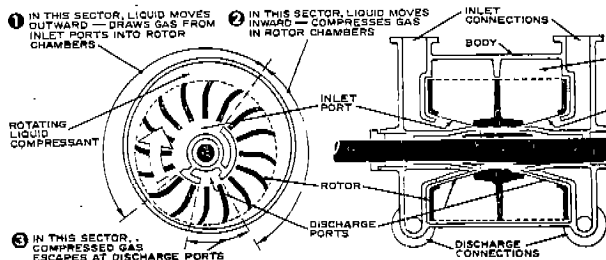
A sectional and end view of a liquid-liner type compressor, courtesy of the Nash Engineering Company
